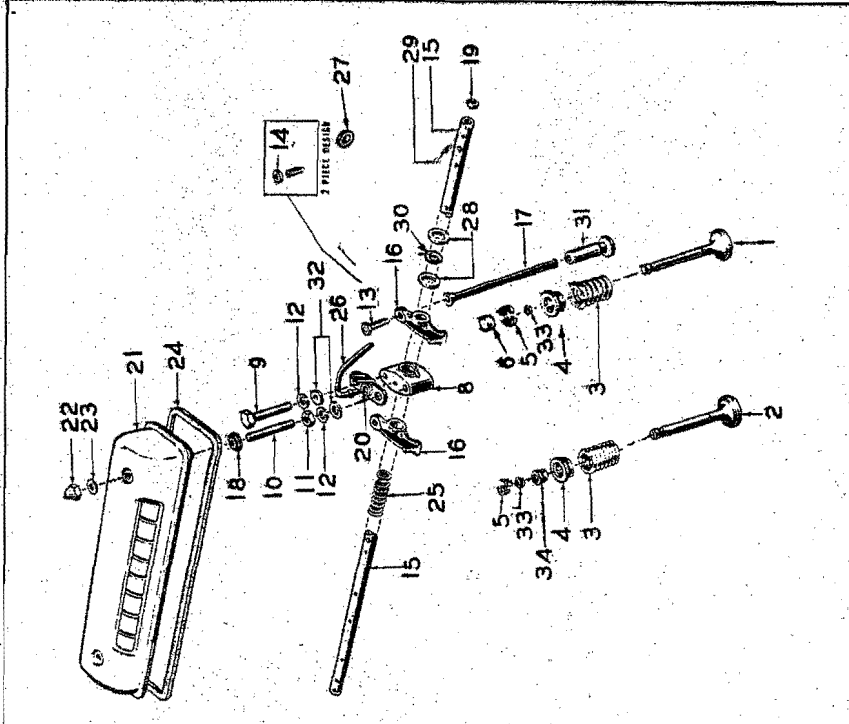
VALVE, ROCKER ARM & RELATED PARTS GROUP
